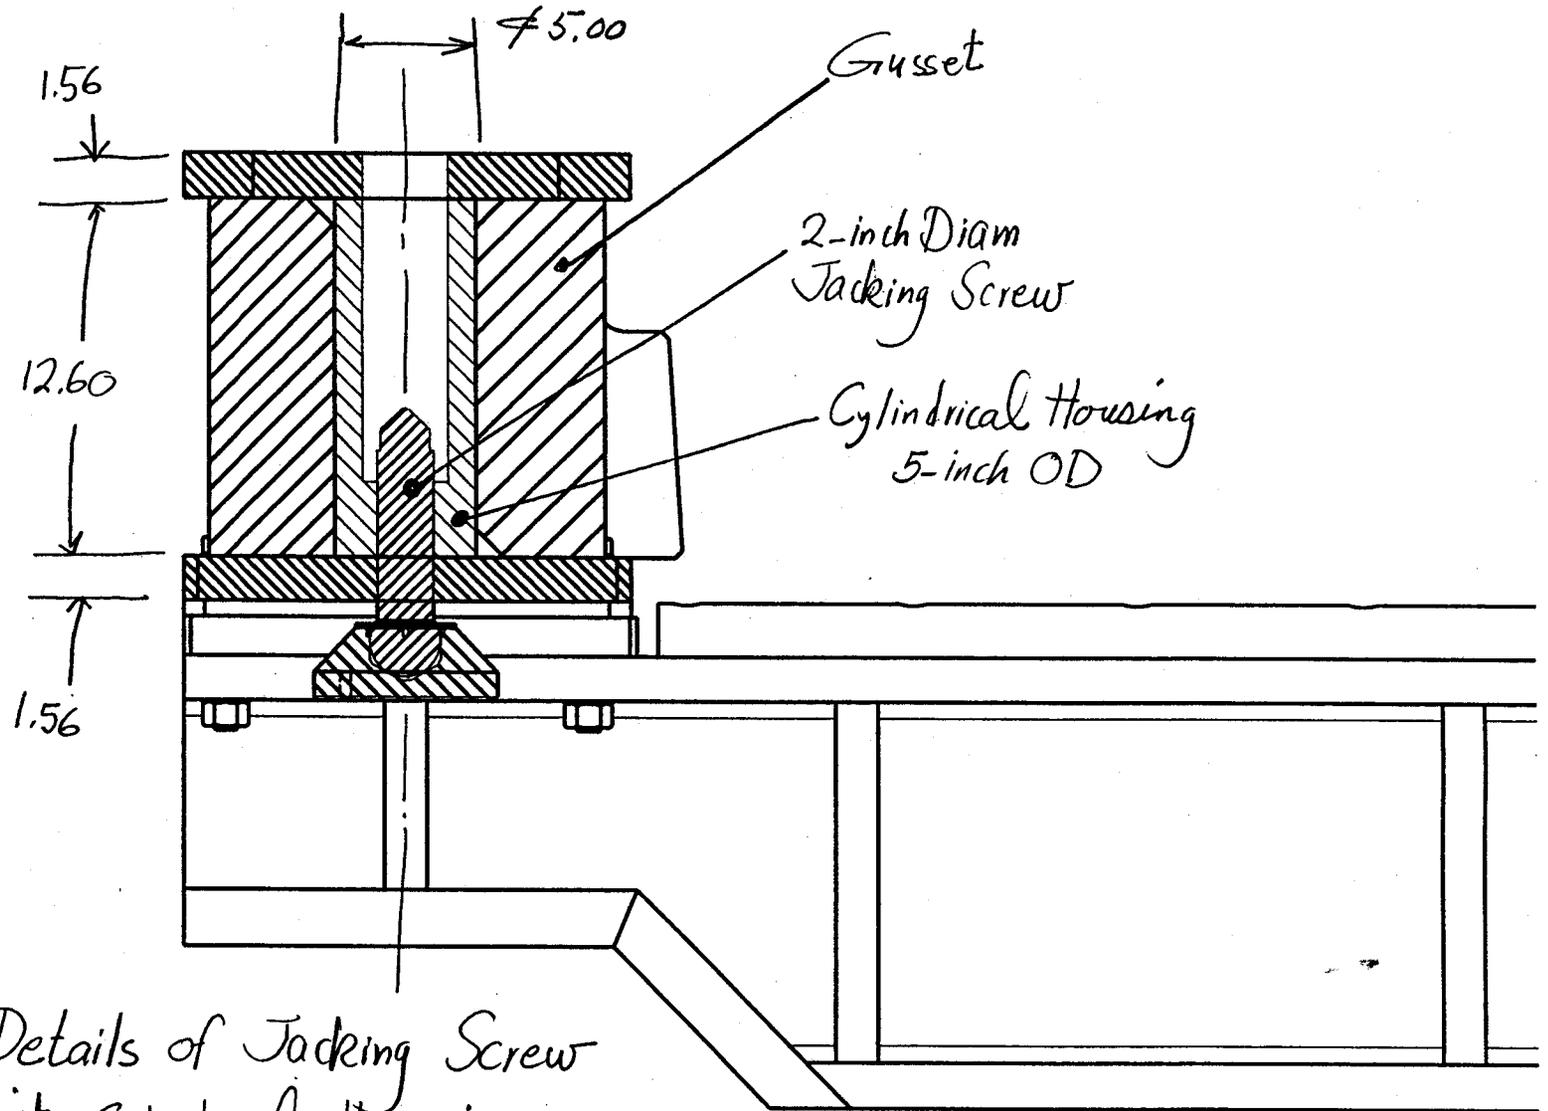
Details of Jacking Screw and its Cylindrical Housing
